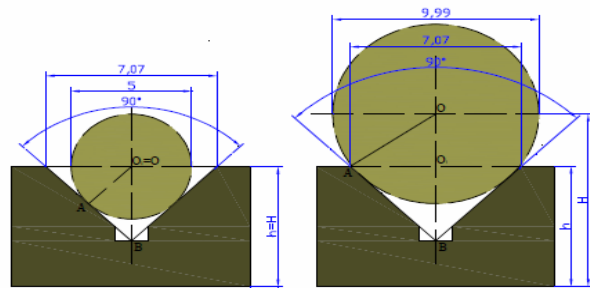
V-block dimensions and diameter of blank. 7,07mm
